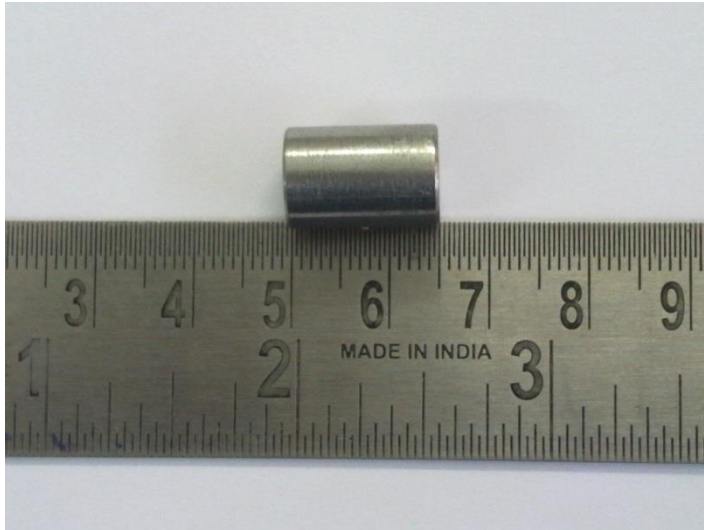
Geometry and dimensions of the steel specimens used for compression tests.
